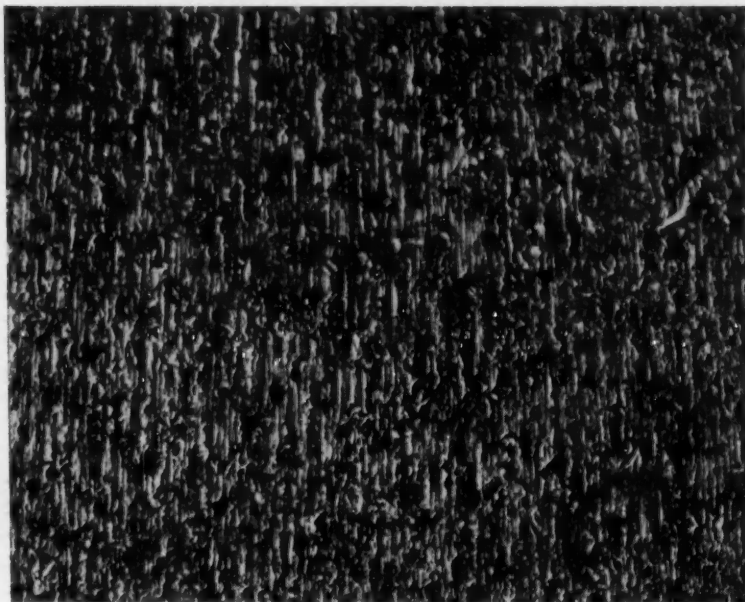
Surface of a Buick coil spring peened with cut-wire shot, magnified 10 times
